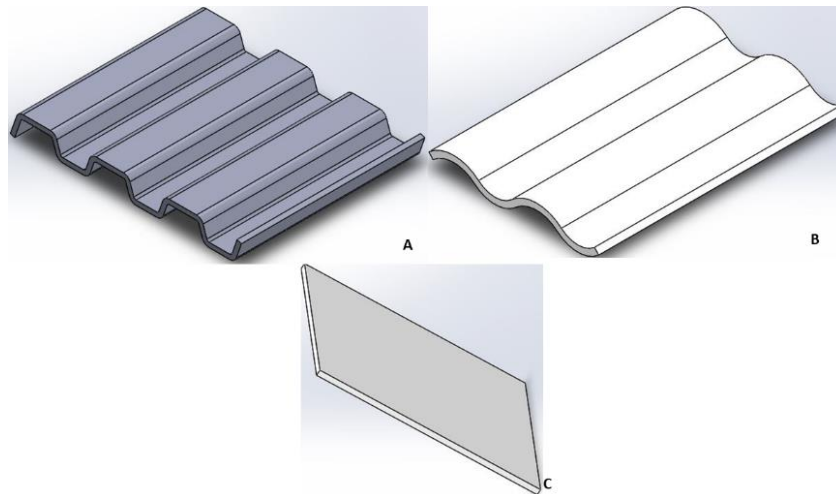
1: SolidWorks Models of the Roofing Sheet Profile Prototypes: (a) Rectangular Corrugated Sheet, (b) Corrugated Sheet, and (c) Flat Sheet.
